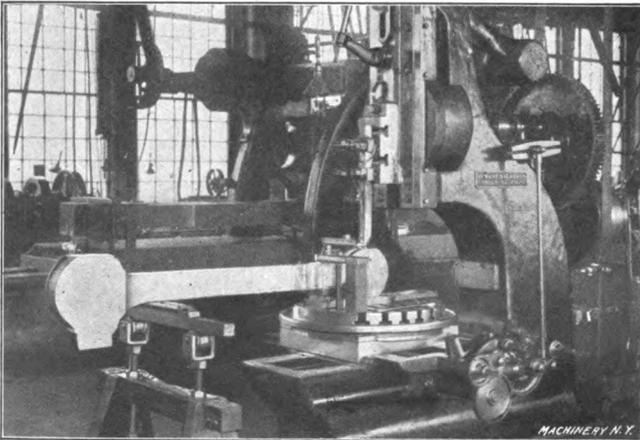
Machining the Knuckle-joint Slot for the End Rod in the Slotting Machine
